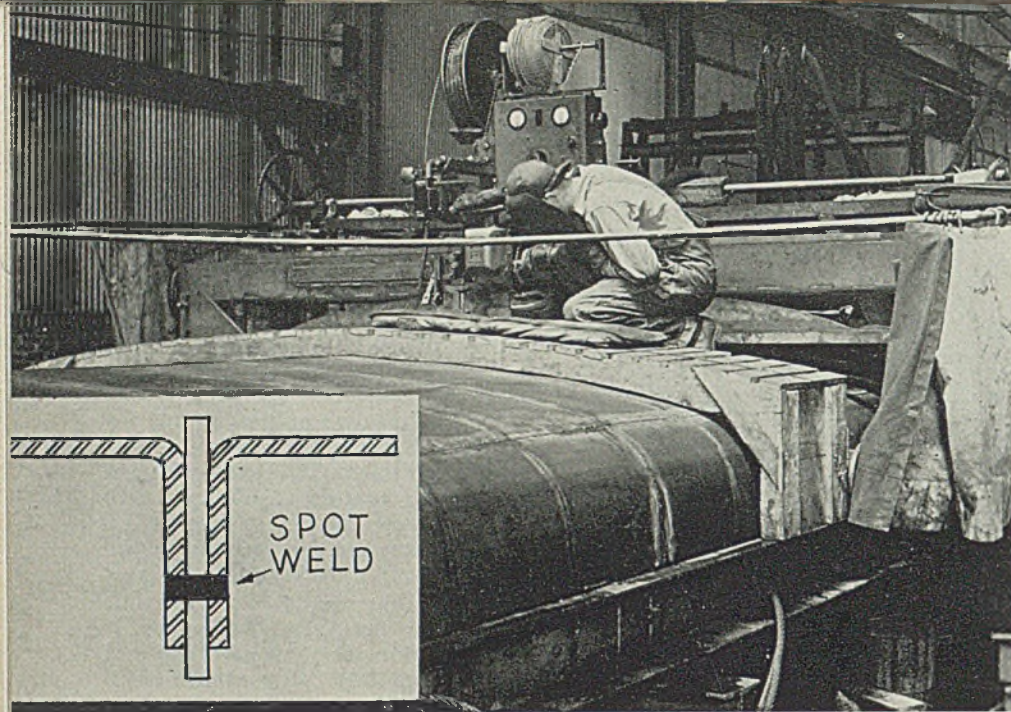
Here is an unusual setup. A filler strip is spot welded between the flanges of sheets that form a railroad car top. The automatic head then melts down this filler strip to produce a smooth joint flush with car top. Head traverses the work here. Inset shows arrangement of filler strip before finish welding
